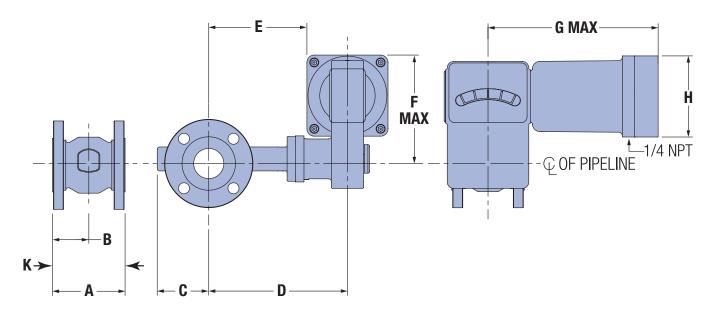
Typical Valve and Actuator Assembly Dimensional Diagram
